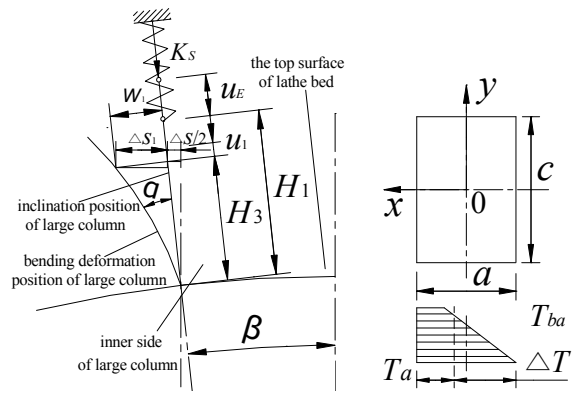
Bend thermal deformation and cross-section temperature distribution of the large column of CNC gear hobbing machines.
